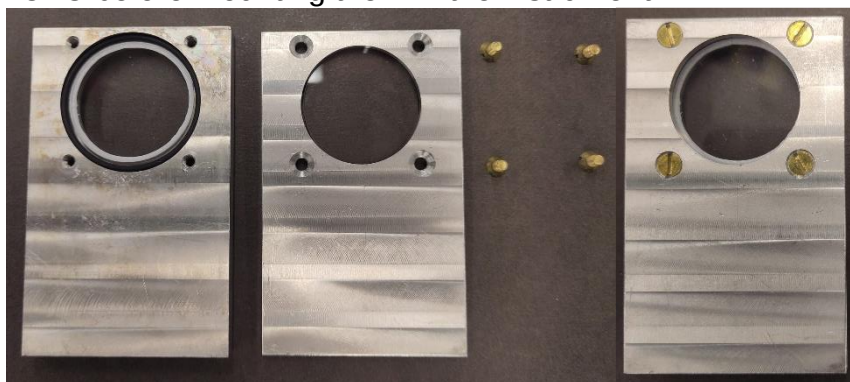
Aluminium sandwich cell, left: unassembled, right: assembled.
